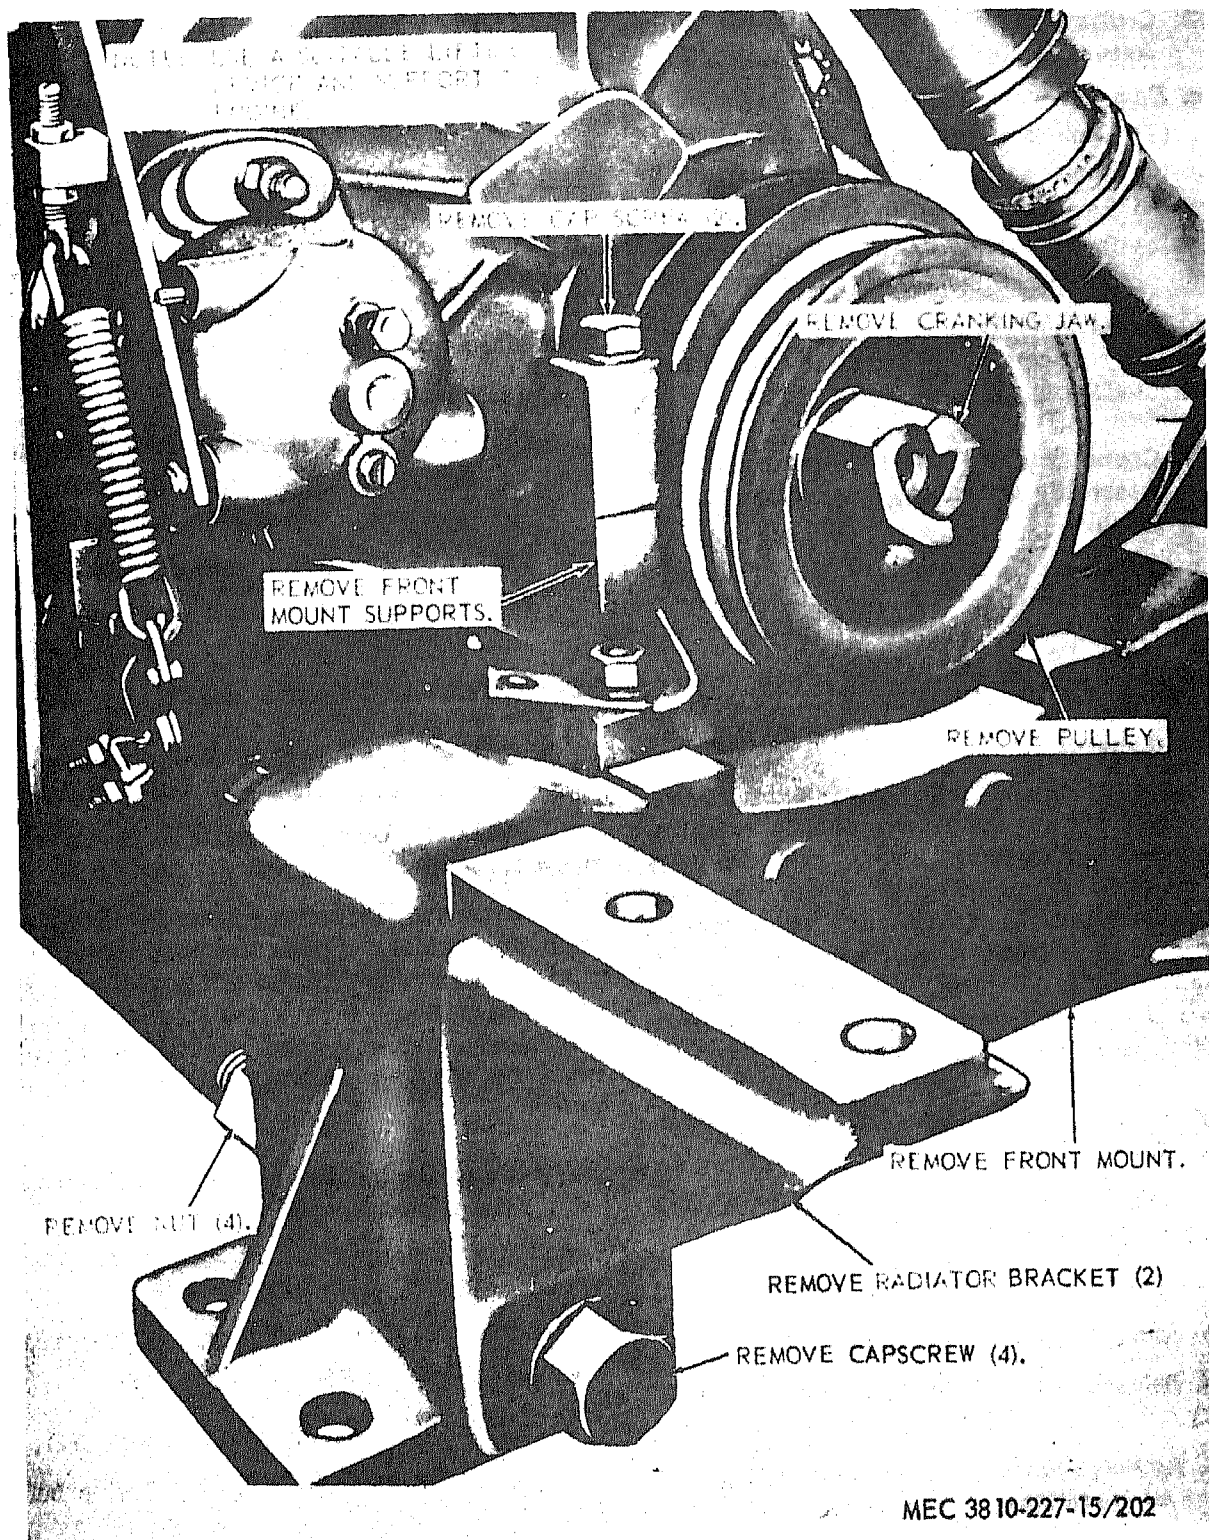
Crane engine front mount and pulley assembly, removal and installation.
